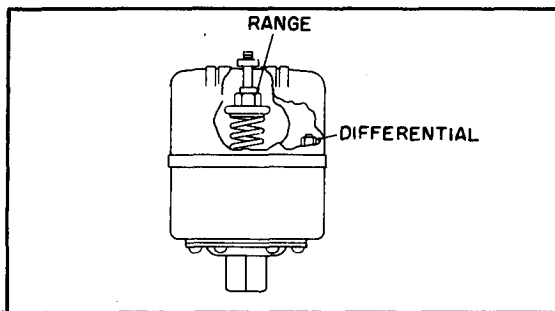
Pressure Switch Cut-In and Cut-Out Adjustment
